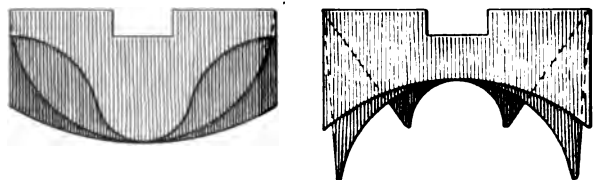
Cross Section of Trunk Shaped Tool Box.
